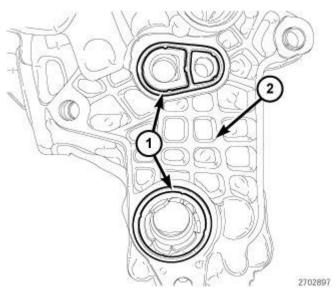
O-RING SEALS & OIL FILTER HOUSING Courtesy of CHRYSLER LLC
